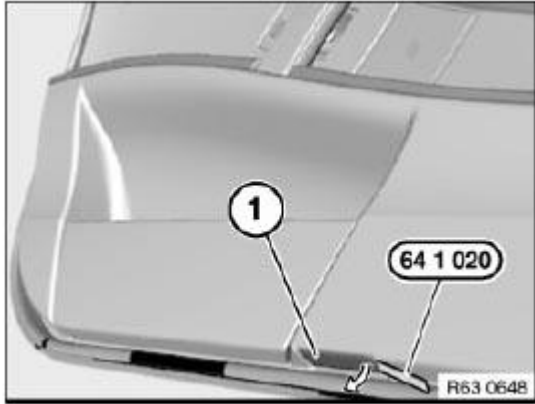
Identifying Footwell Light With Special Tool (64 1 020)
